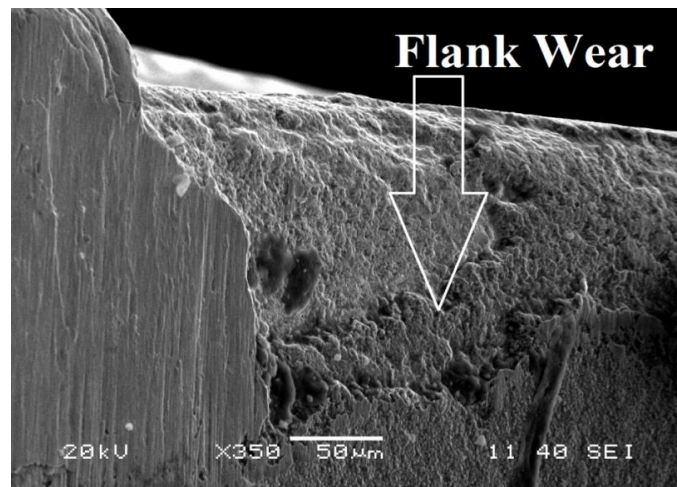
(c) Flank wear of CVD coated WC insert at spindle speed of 421 RPM, depth of cut of 1 mm and feed rate of 0.20 mm on right side of tool tip
